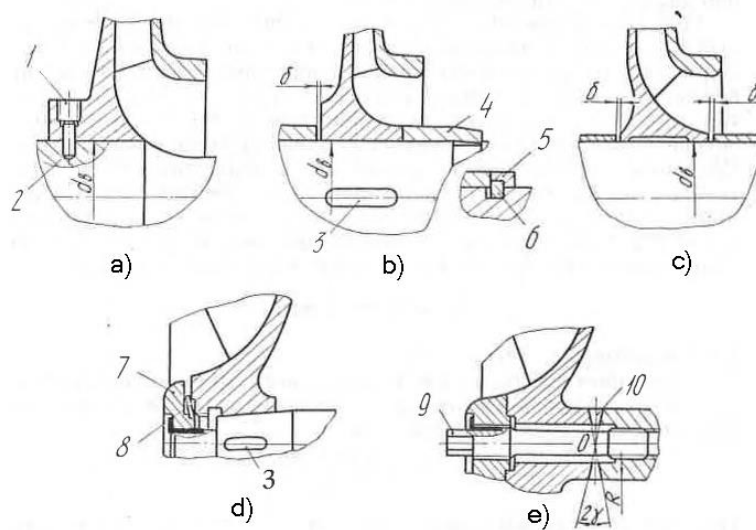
Mounting unit of the impeller: 1-screw; 2-pin t; 3-key; 4-locking sleeve; 5-lock ring; b-half-ring; 7-nut; 8-spring washer; 9-tie pin; 10-end slot connection;  $d_B$ -shaft diameter
